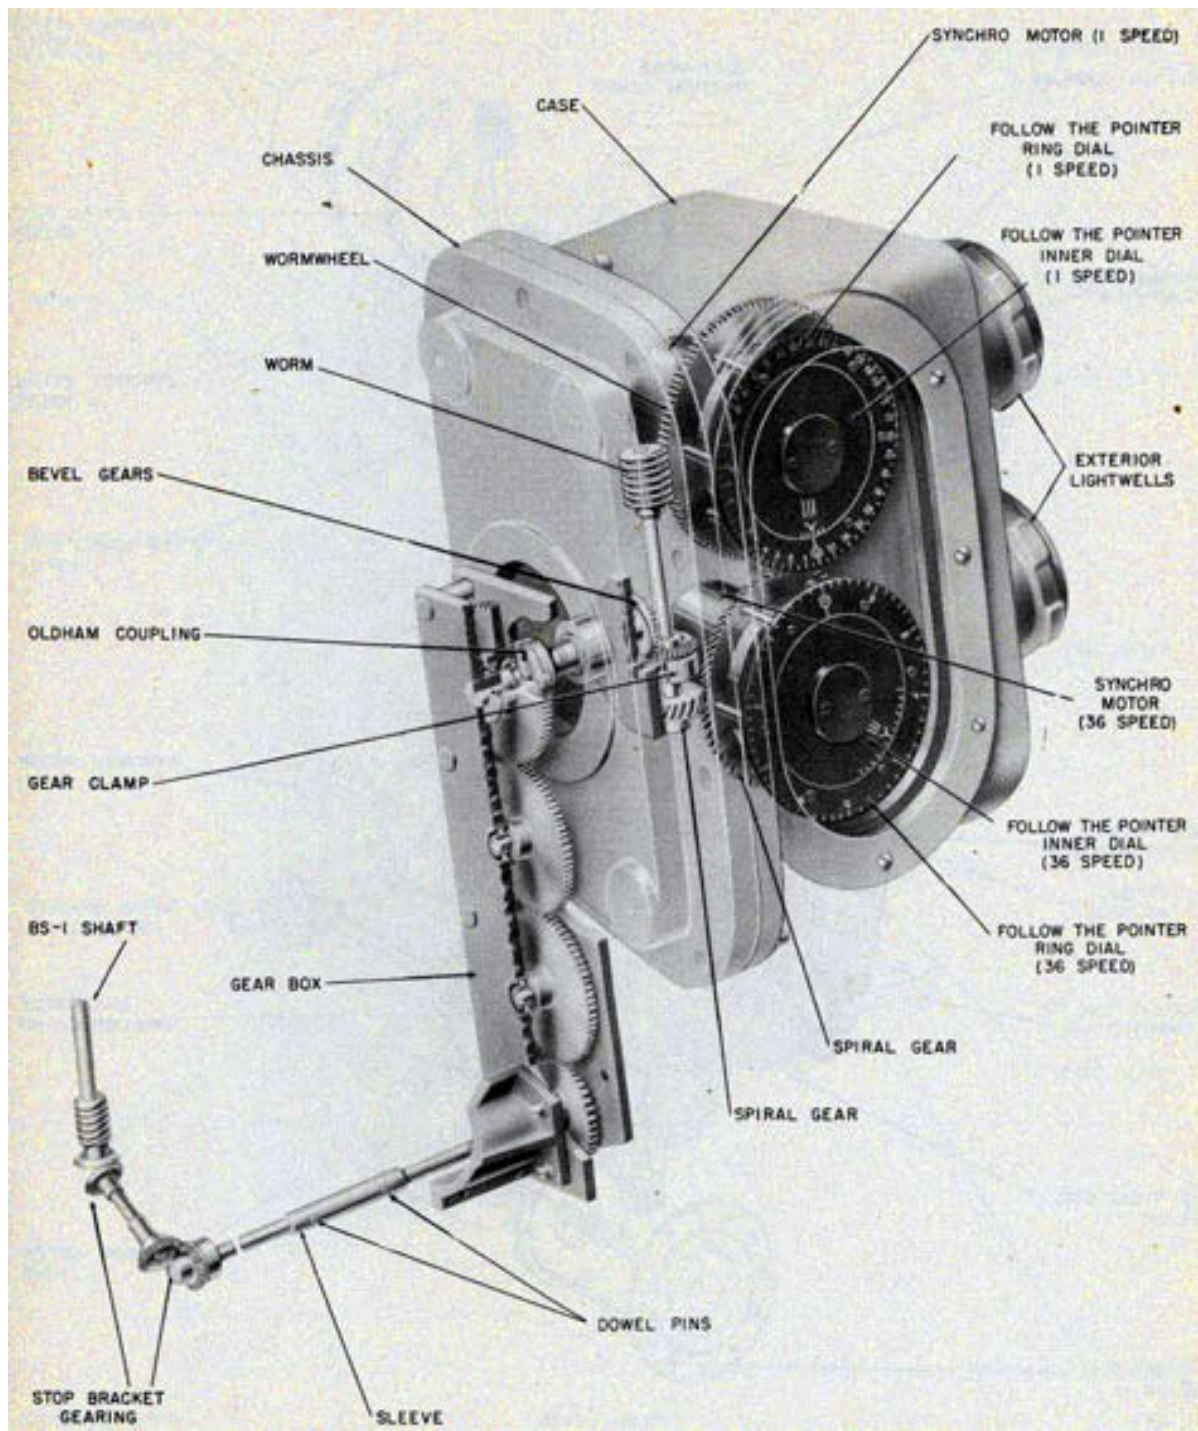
Cutaway of external lighting type bearing receiver showing synchro motors, dials, gearing, and shafting.
